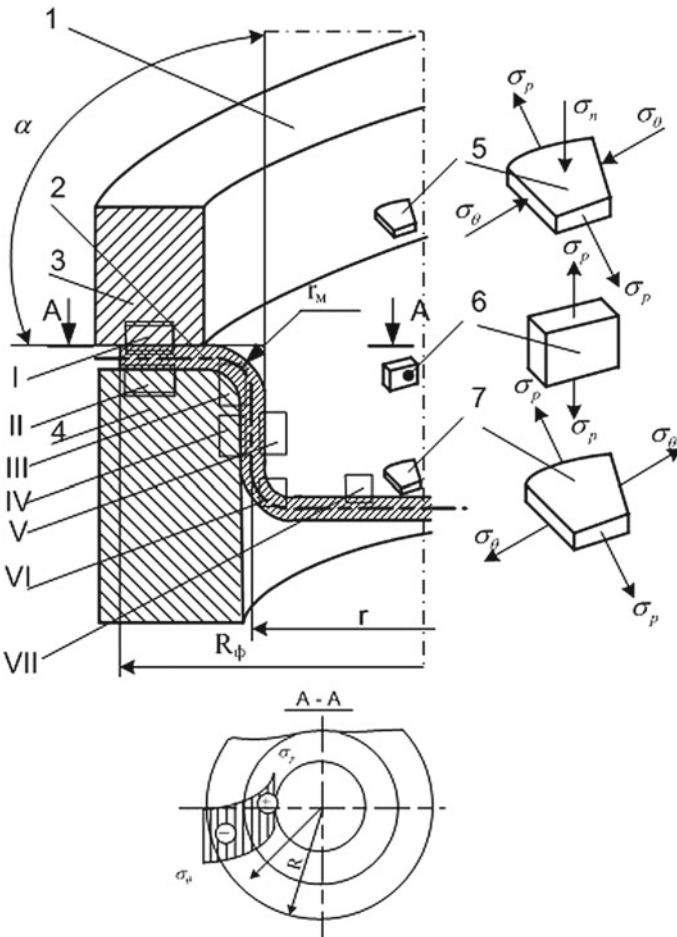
Deep-drawing scheme of axisymmetric billets from the sheet steel: 1—punch; 2—the billet; 3—clamp; 4—matrix; 5, 6, 7—elements of the billet, I–VII—tribosystem
